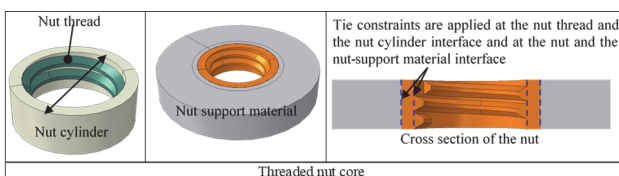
Components of nut model: nut thread, nut cylinder and nut backing
